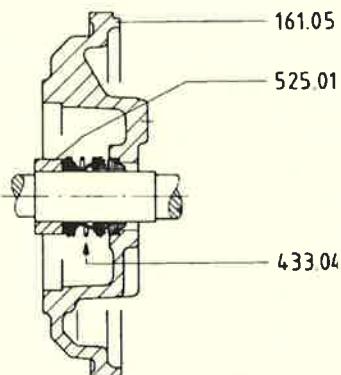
U3.9D, U3.12D – Unbalanced mechanical seal
